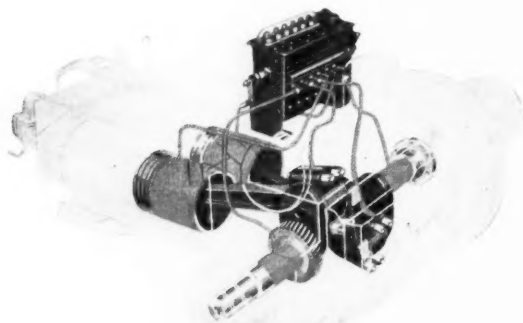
Showing the Hart-Parr fresh oil force-feed system of Tractor engine lubrication. The oil pipes which lead from the lubricator to the main bearings and pistons insure effective lubrication and enable the burning of heavier fuels.
